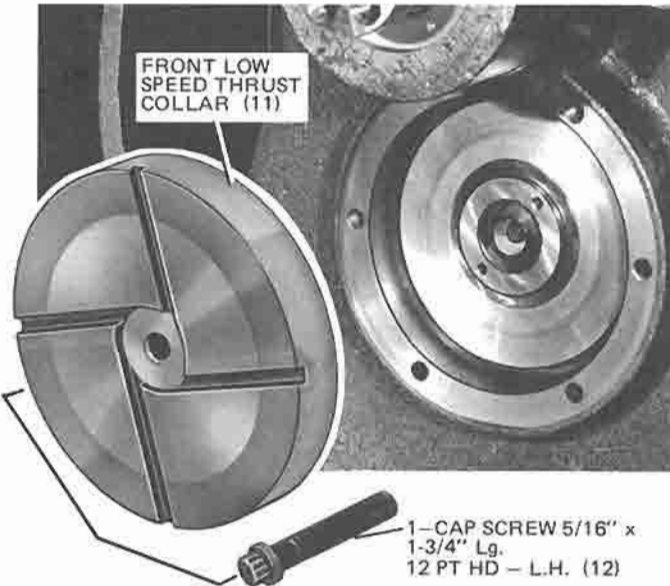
ASSEMBLY OF FRONT LOW SPEED THRUST COLLAR
